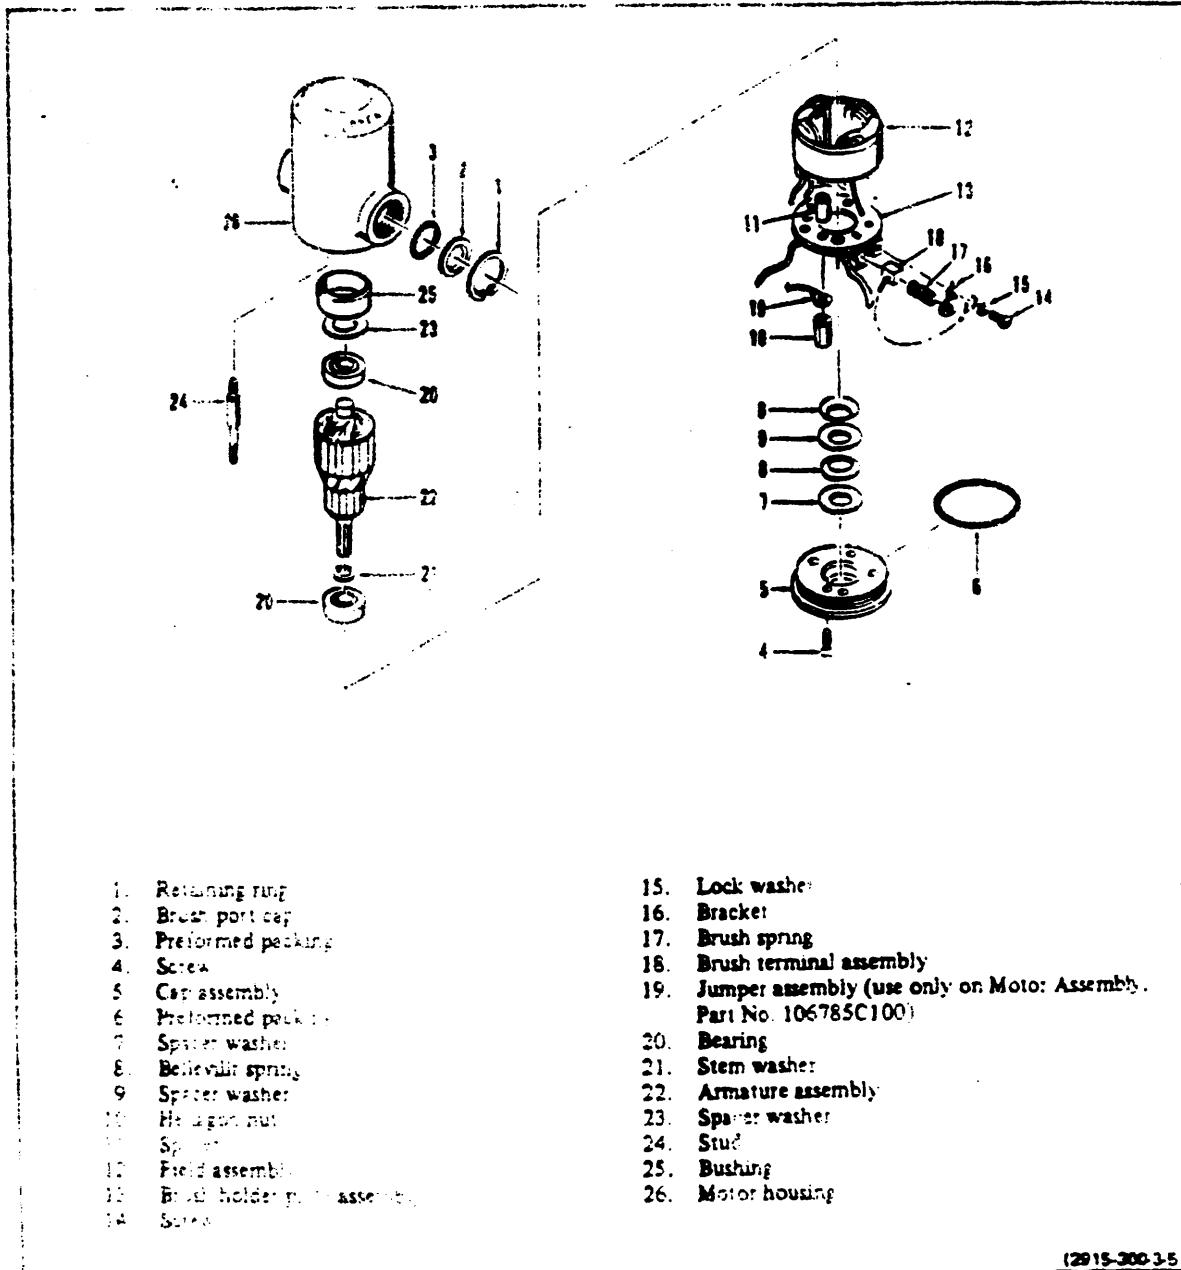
Motor Assembly, Part No. 106785C100 and 102650U100 -- Exploded View
